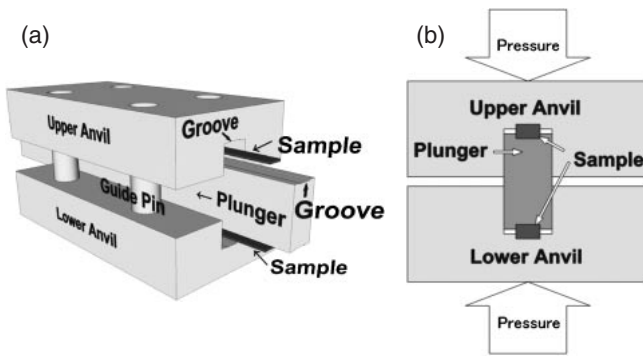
Schematic illustration of HPS. (a) assembly of two anvils with guiding pins, one plunger and two thin sheet samples. (b) cross sectional view of assembly.
